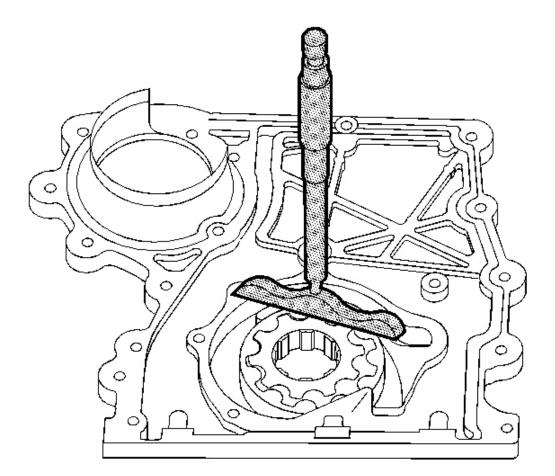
Measuring Clearance Of Oil Pump Gear Side Courtesy of GENERAL MOTORS CORP.
